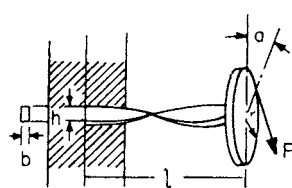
Straight bar spring: rectangular cross section.
